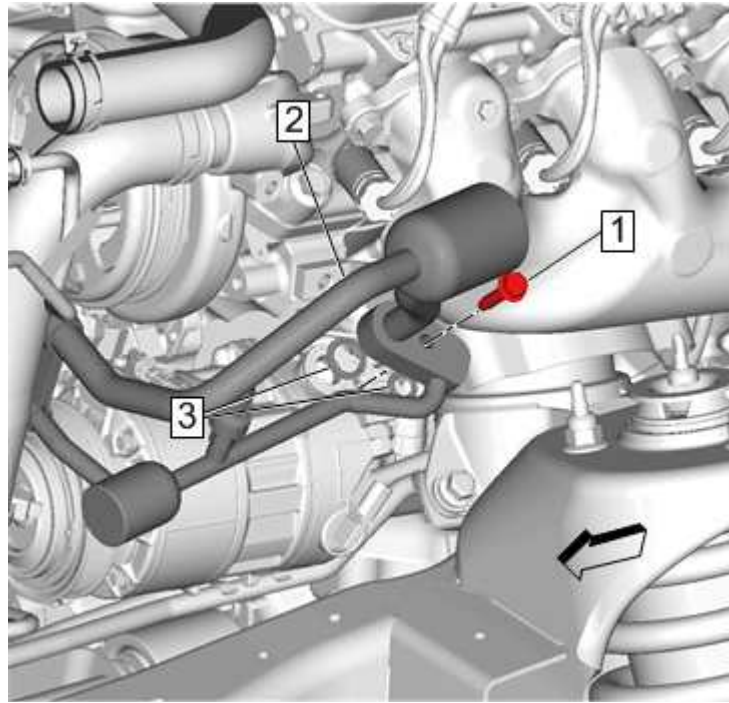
Air Conditioning Compressor Hose, Bolt And Seal
